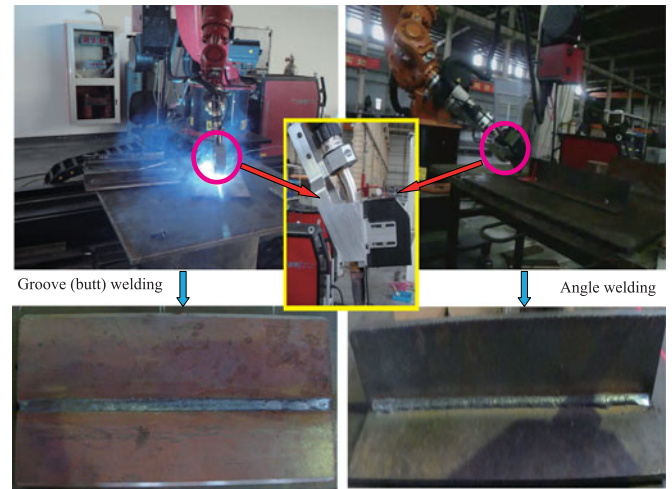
Welding experiment environment and welding workpieces.
